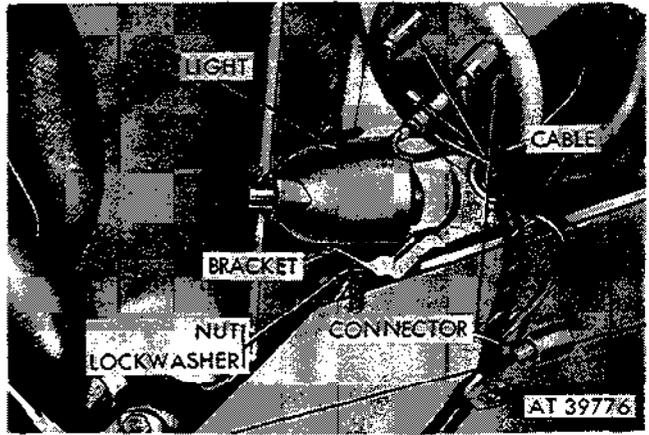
Remove blackout marker light assembly (M151, M151A1, M151A1C, and M718 Vehicles).
